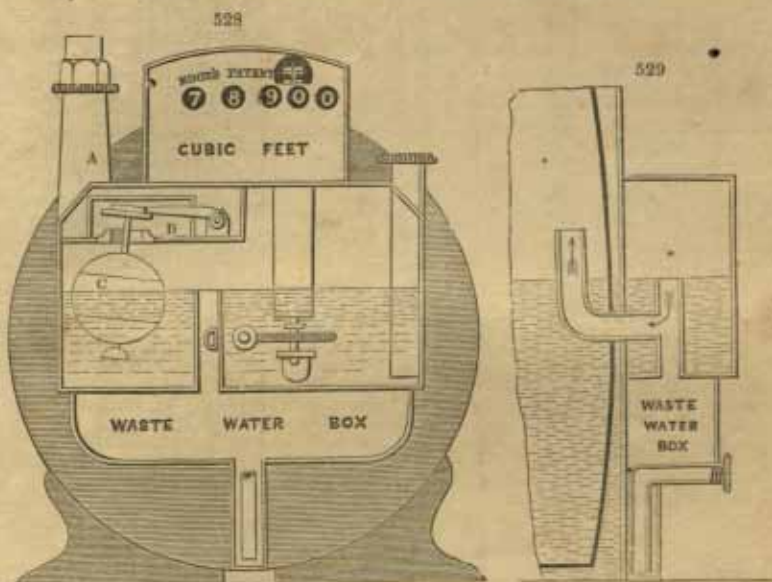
is a front view of a three-light meter, the front plate being removed, and some of the parts shown in section.
